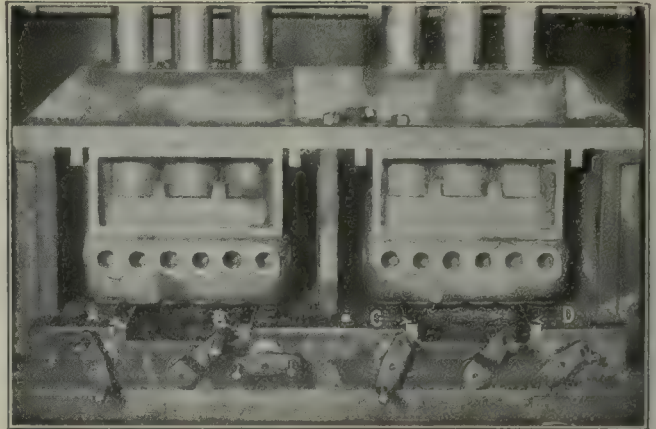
ROUGH-BORING TOOL BLOCKS IN DOUBLE FIXTURE
